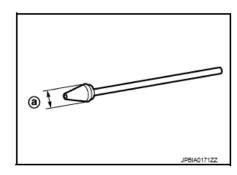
Identifying Compression Tester Adapter Dimension Courtesy of NISSAN NORTH AMERICA, INC.
